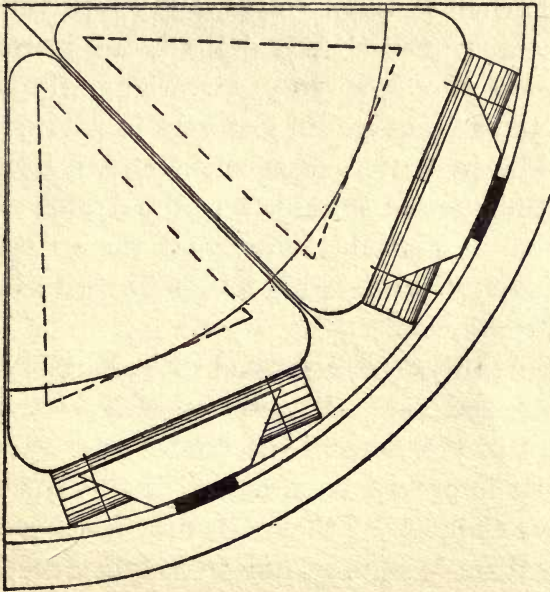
$\frac{1}{4}$  Plan, Octagonal Escape Valve for 12-in. drive, or Ascension Valve for 18-in. drive.
